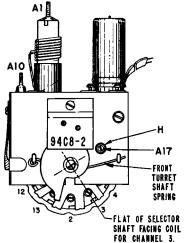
Front View of 94C8-2 Tuner With Sharp Tuning Rotor Outside Chassis.
